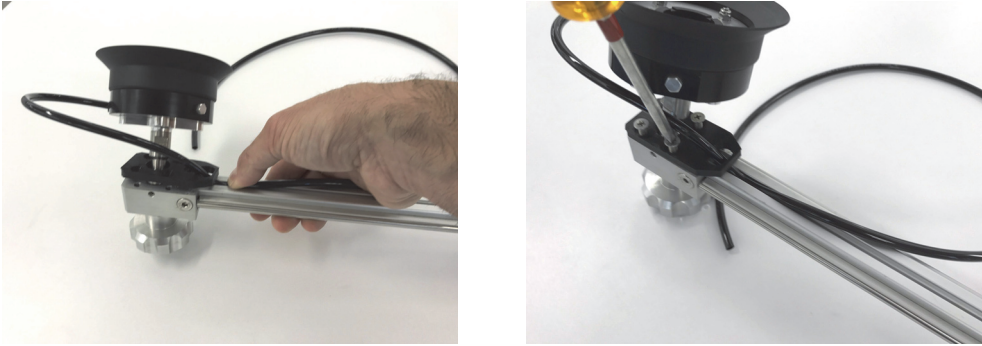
Pushing the tube into the frame (*left*) and tightening the screws (*right*)
